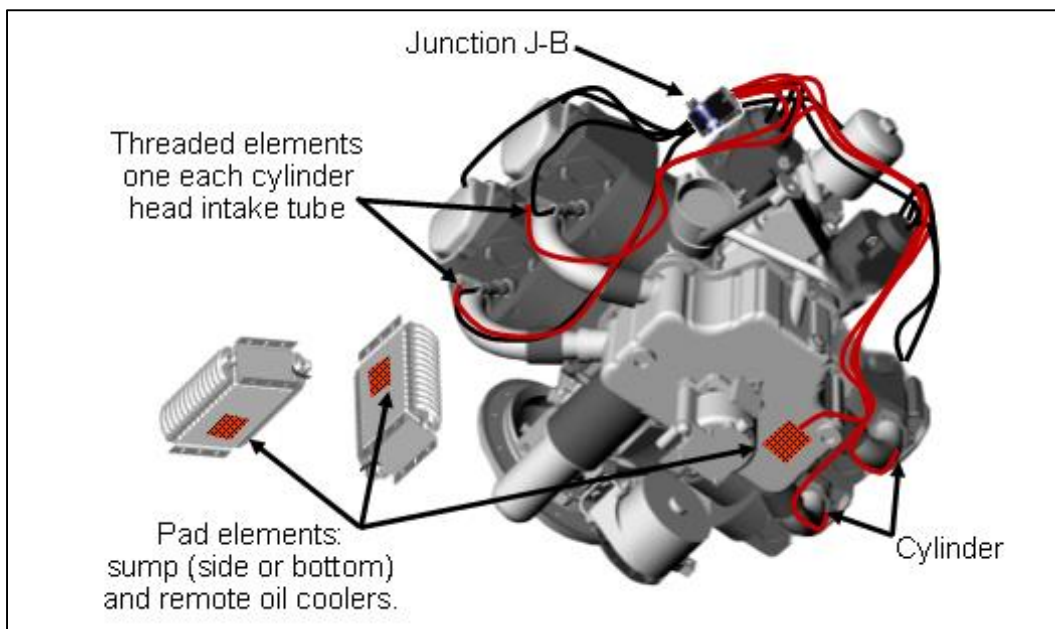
General engine layout. Refer to § 3.3 for applicable element installation instructions. Locate junction J-B on and route cable leads with ignition leads to corresponding elements, secure with cable-ties.
